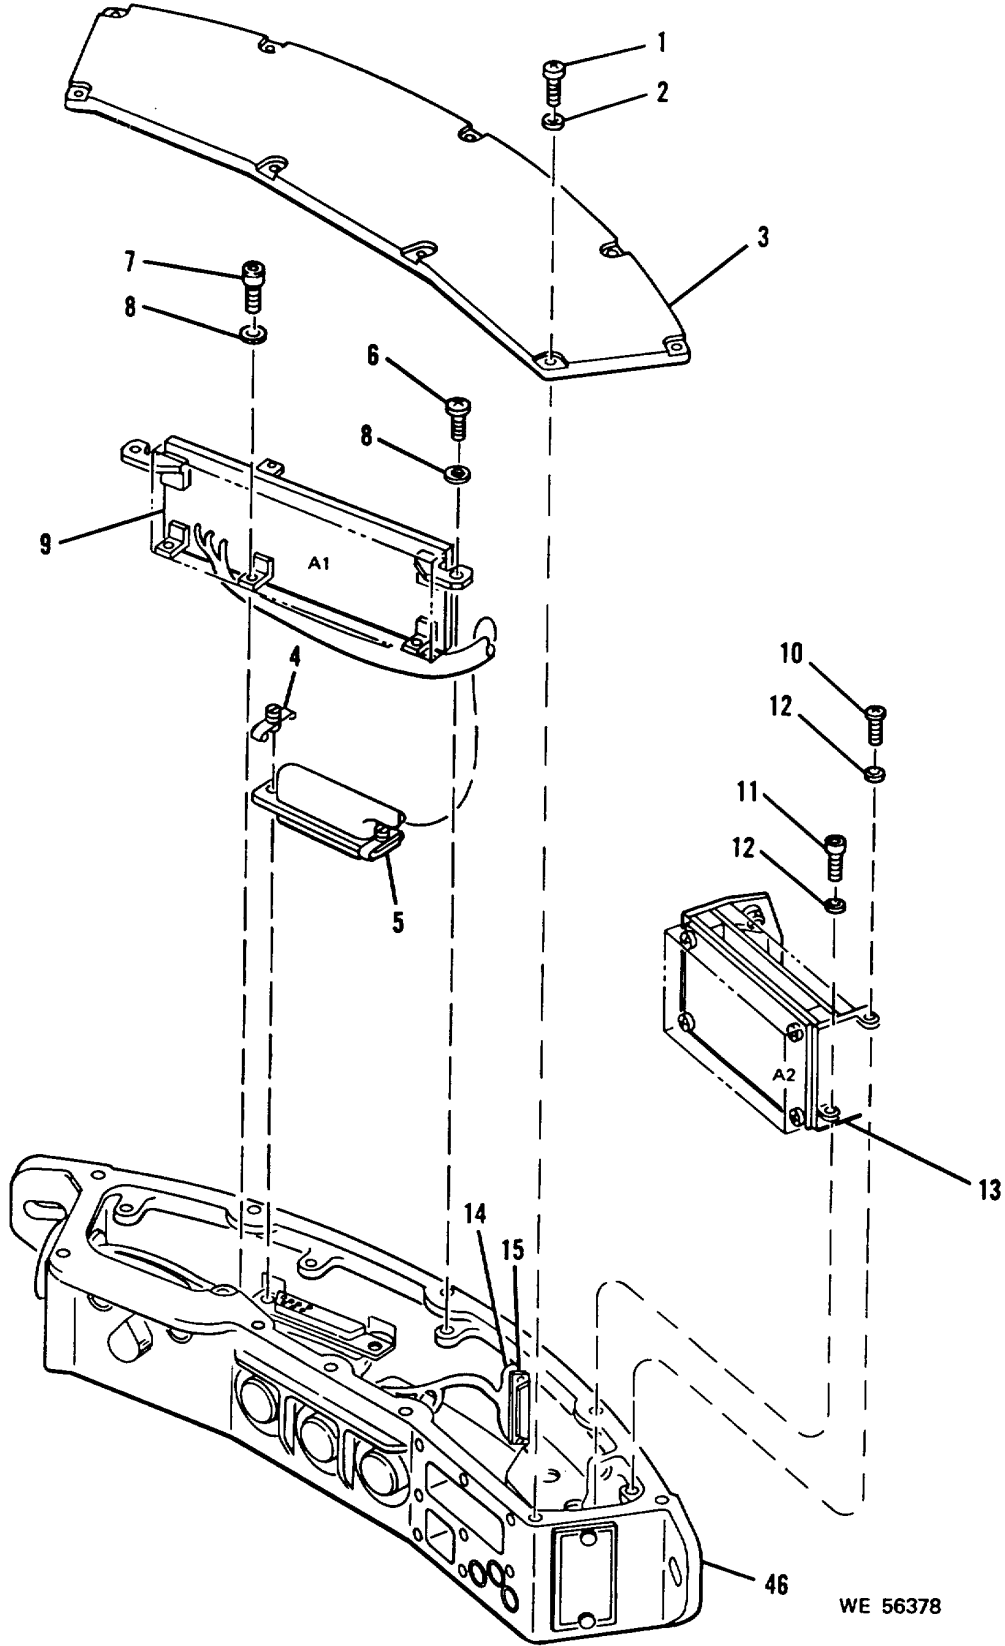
Disassembly of Laser Ranging Commander's Control C-9134/VVG-1 (A79) (Sheet 1 of 2 sheets).
